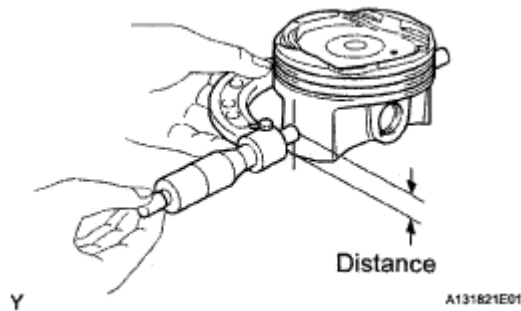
Measuring Piston Diameter At Right Angles To Piston Center Line
